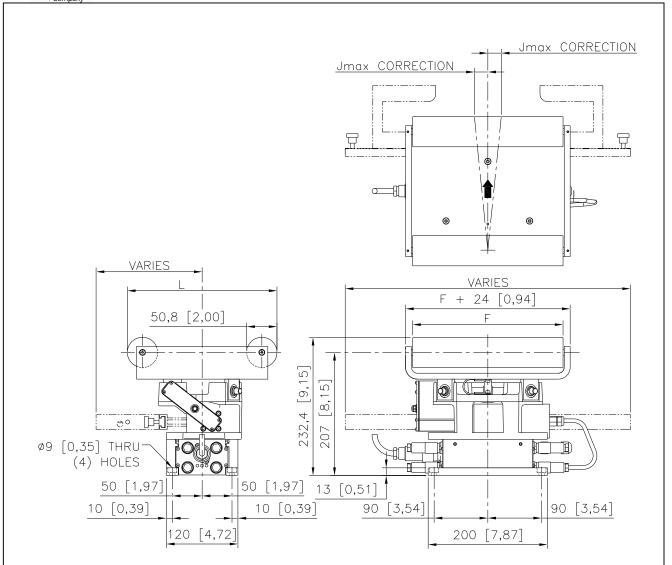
DS-25 WITH PROCESSOR AND INTEGRATED SENSOR MOUNTING Dimensions are mm [inches]
